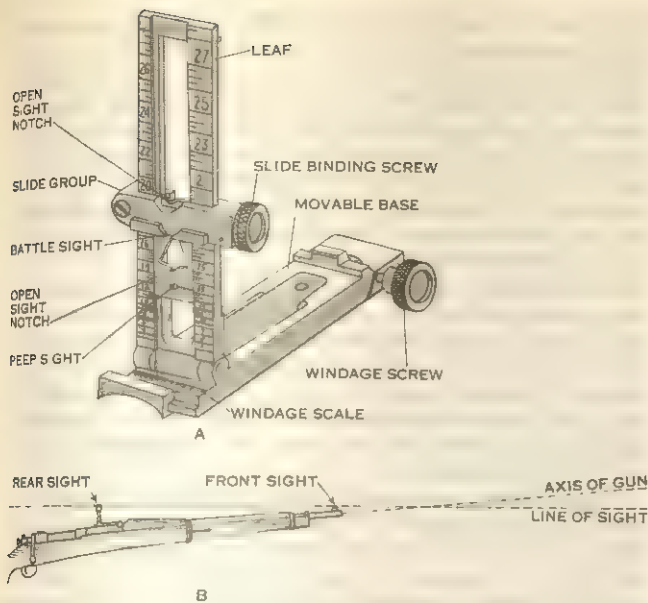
RIFLE AND MACHINE-GUN SIGHTS: (A) CLOSE-UP VIEW OF LEAF SIGHT; (B) ARRANGEMENT OF RIFLE SIGHTS
